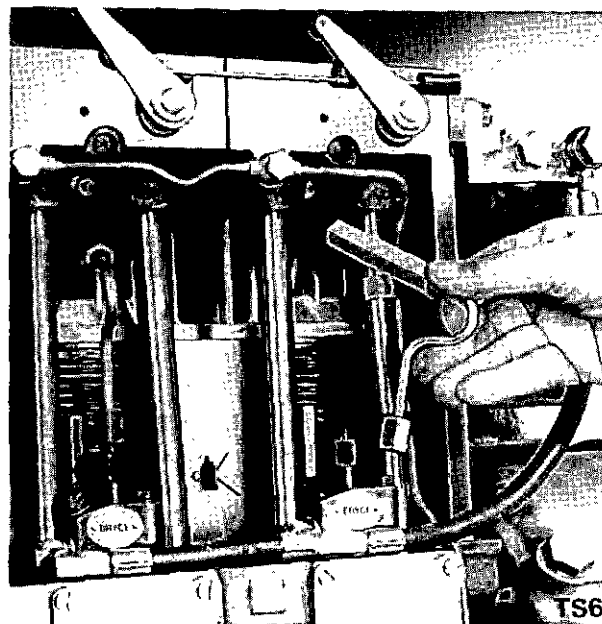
Removing Fuel Pipe between Fuel Pump and Injector.
